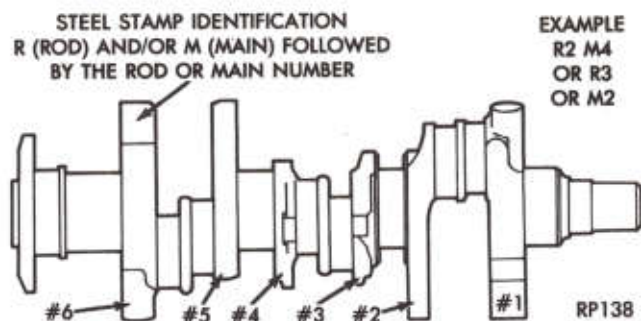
Location of Crankshaft Identification on Number 6 Counterweight
